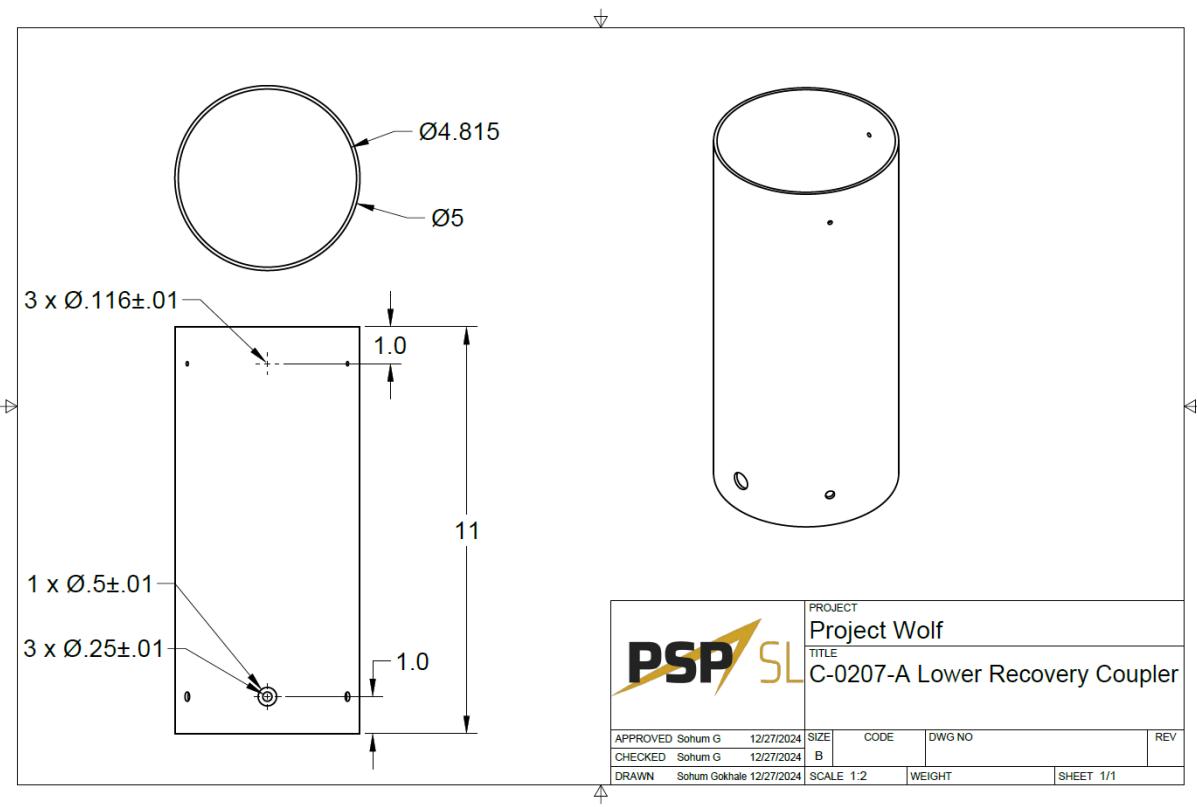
Lower Recovery Coupler Technical Drawing
